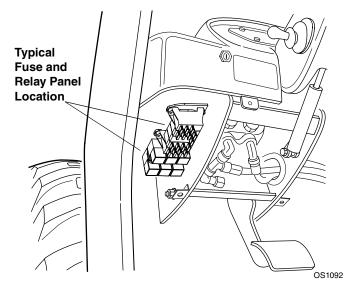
The fuse and relay panel is mounted under the lower left side of the operators console behind the lower dash panel (typical).
